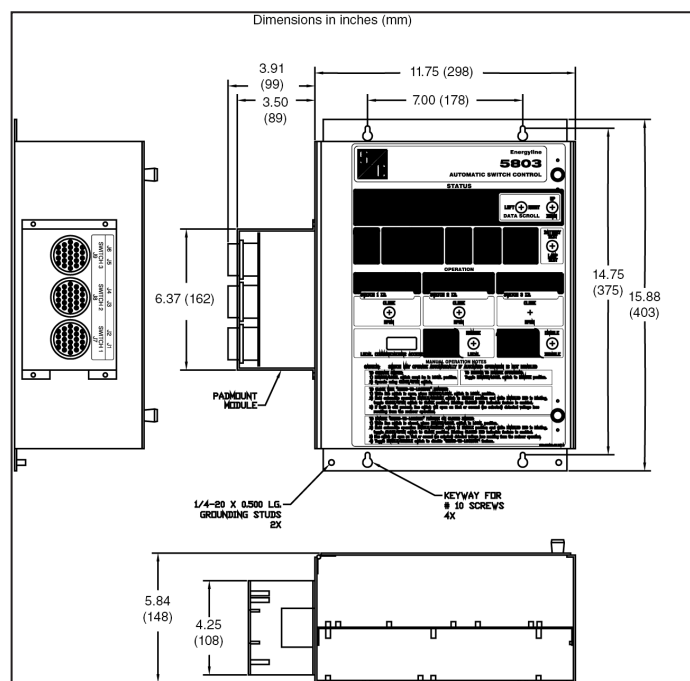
Switch control chassis for mounting in pad-mounted gear.
